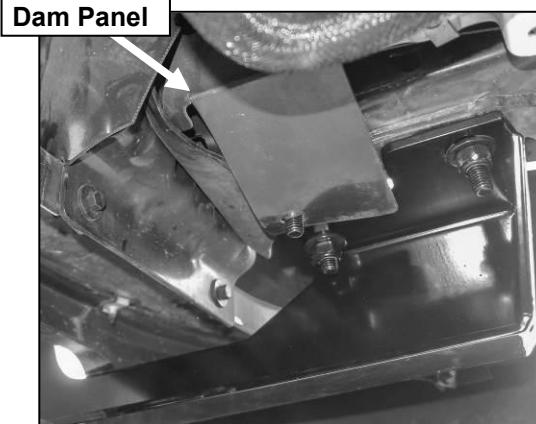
Starting at the wheel well, slide Top Support bracket between bumper and fascia.
